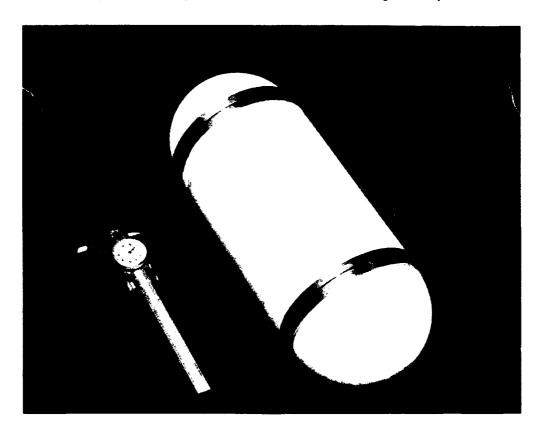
The 6-inch-OD ceramic housing assembly using ceramic end closures.
